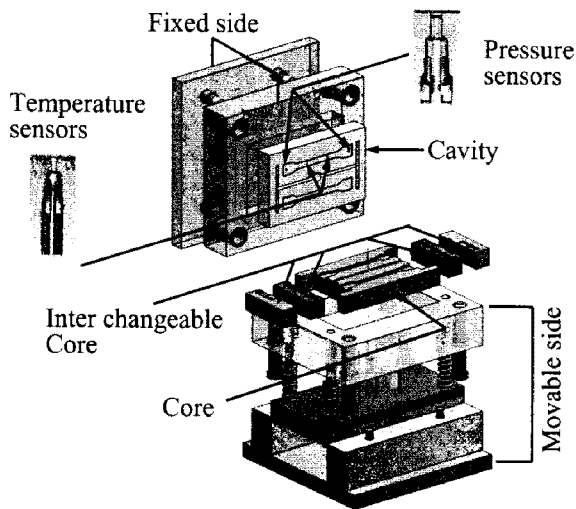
Designed injection mold and mold-base with sensors for manufacturing tensile test specimen
